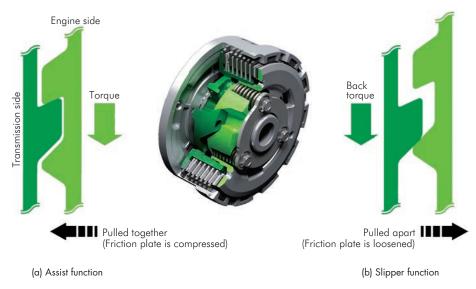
Cam mechanism of the Assist & Slipper Clutch
